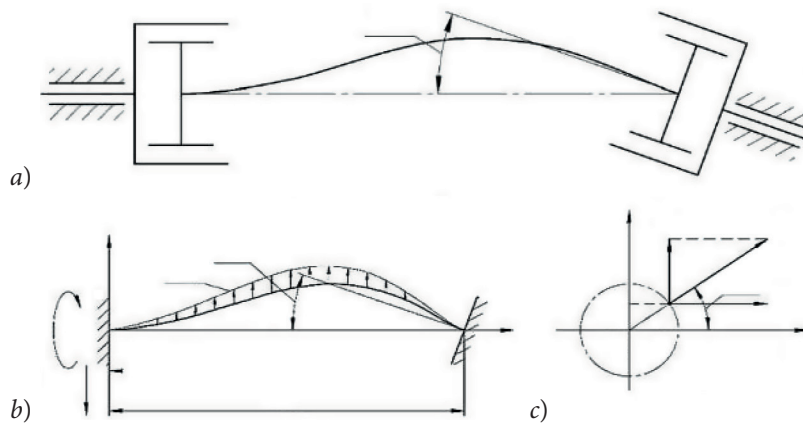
Shift (a) and misalignment (b) of the engine axis:
